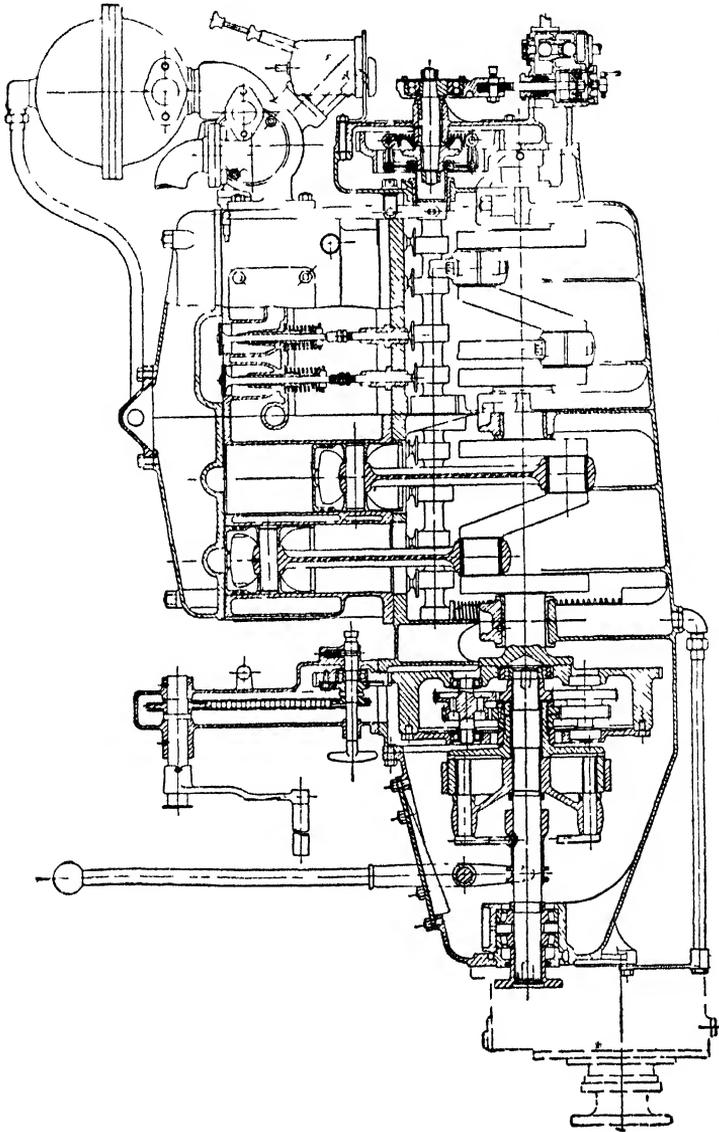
Sectional Arrangement of "RD4" Engine and Reverse Gear
